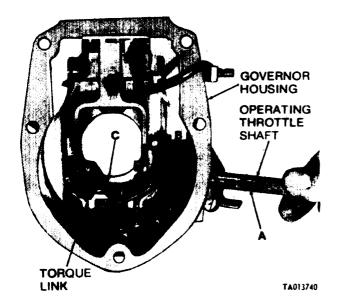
Removing or installing torque link assembly in governor housing (code A pumps).
